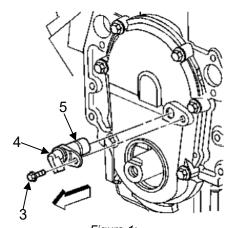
Camshaft Position Sensor (4), Sensor Retaining Bolt (3), and Sensor O-ring (5)
